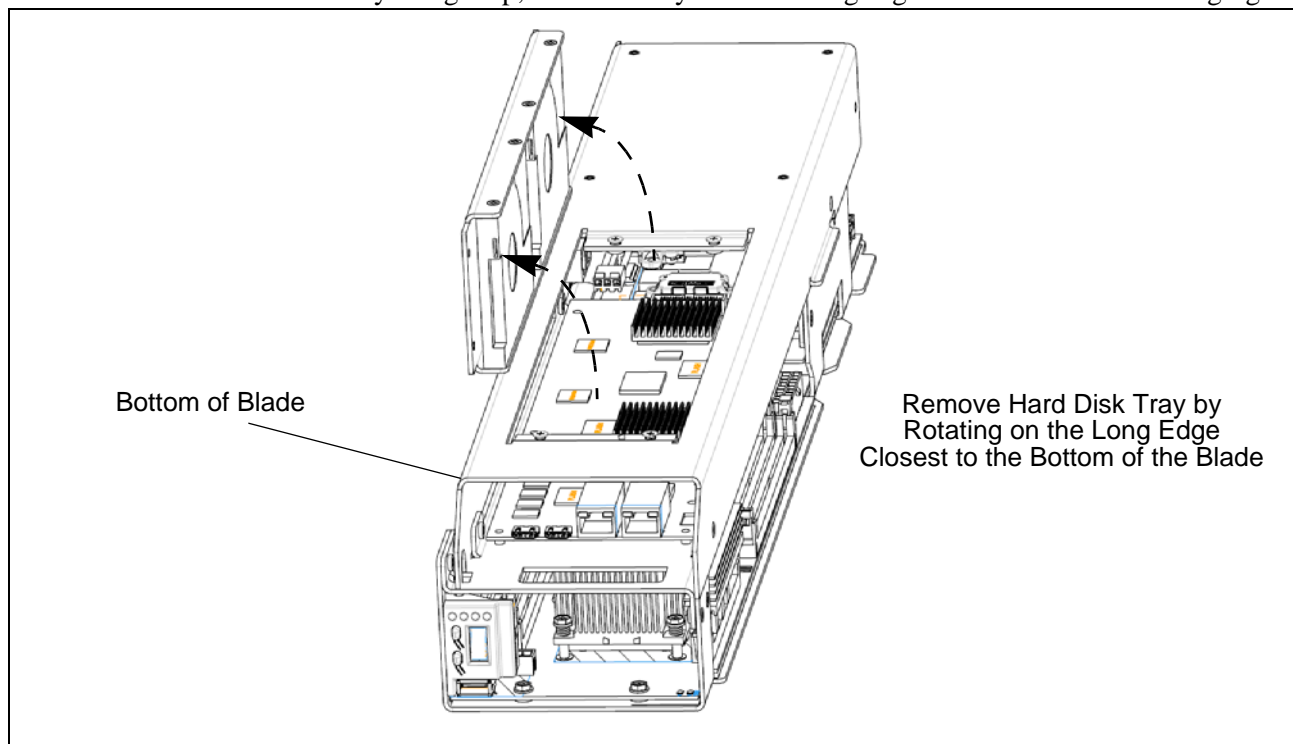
Remove the Hard Disk Tray by Rotating on the Long Edge Closest to Bottom of Blade
